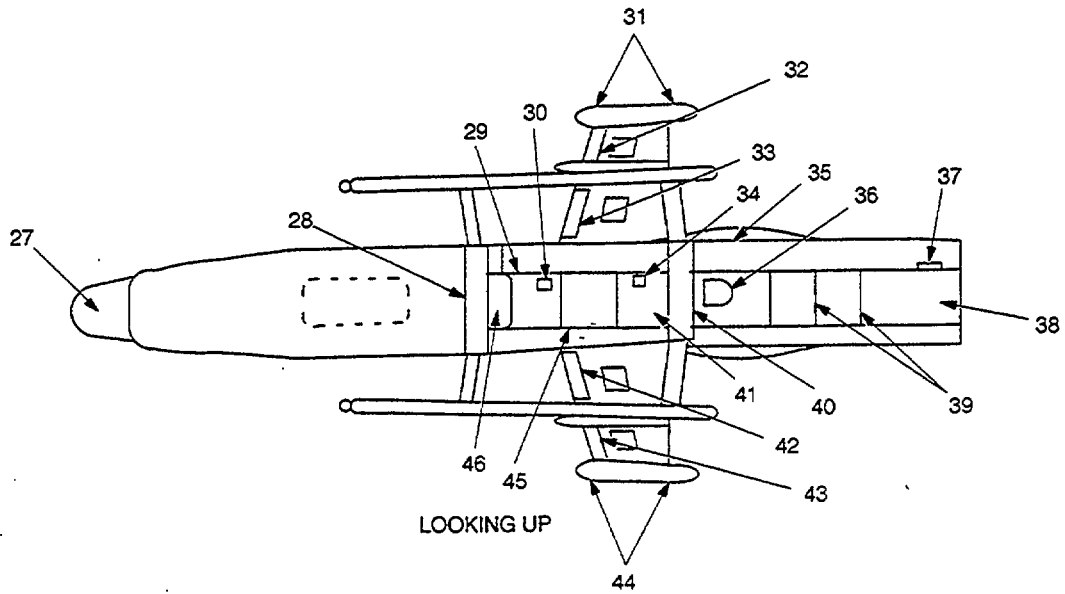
Nonstructural Access Panels, Doors, and Fairings (Sheet 1 of 2).
